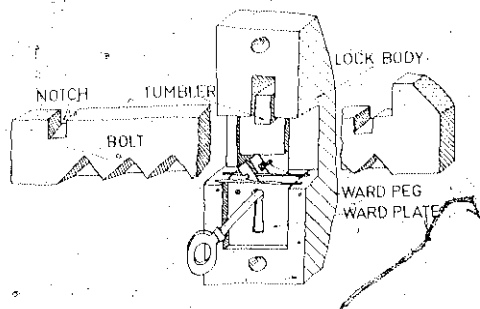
A Toothed-Bolt Lock (bolt partly removed)
